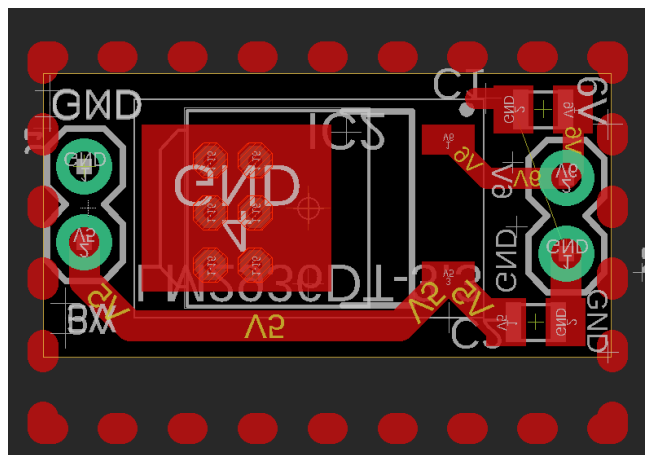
6V to 5V Voltage Regulator PCB For Endoscope Camera - Rory Turnbull
